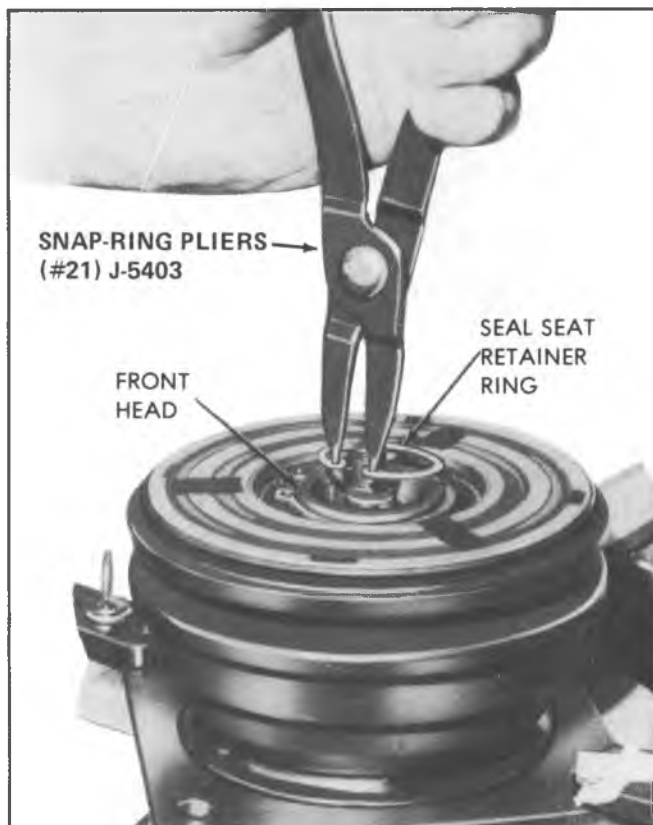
Removing or Installing Shaft Seal Seat Retaining Ring
